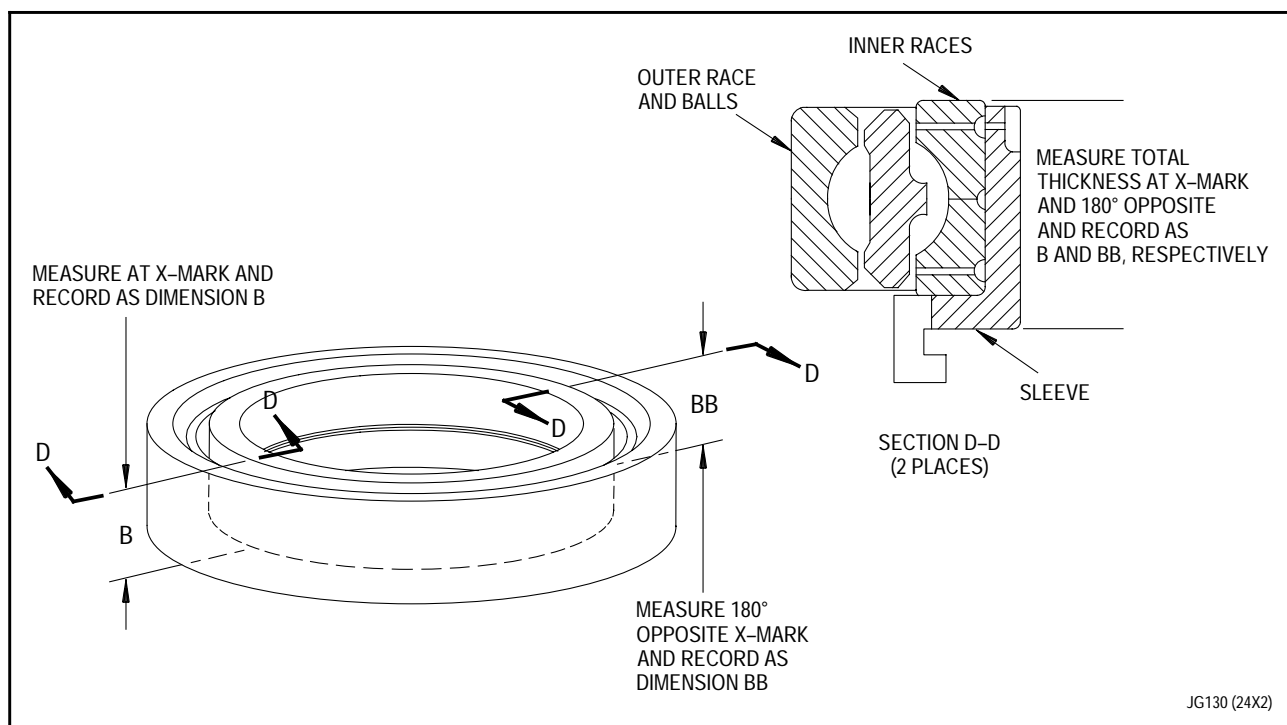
Stack-up Measurement of Inner Races and Sleeve
